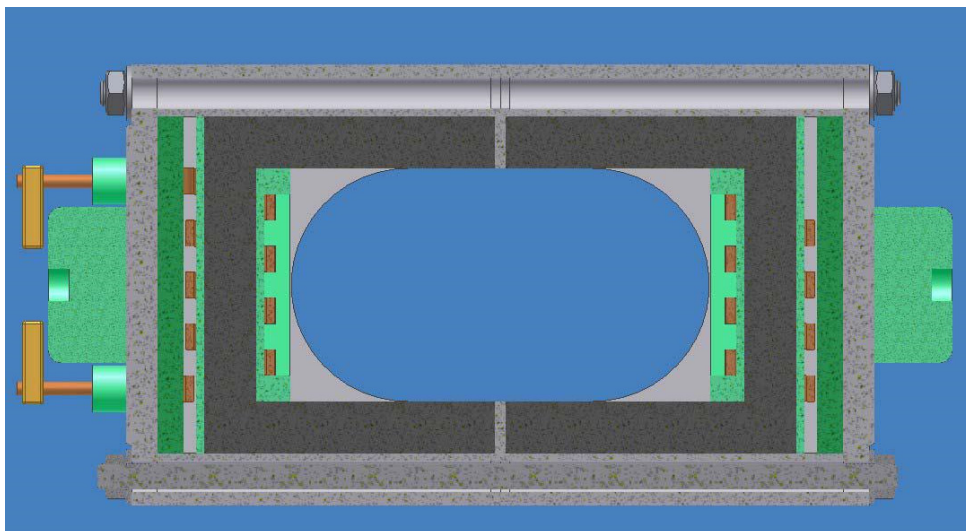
Cut through the assembled half magnets of the injection bumper.
